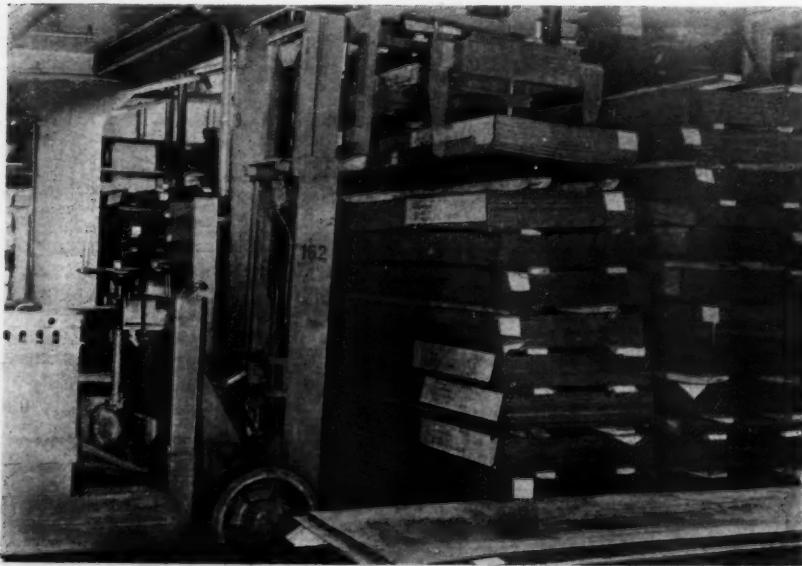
Sheet steel grapple fork truck stacking lamination steel in low head room area.
